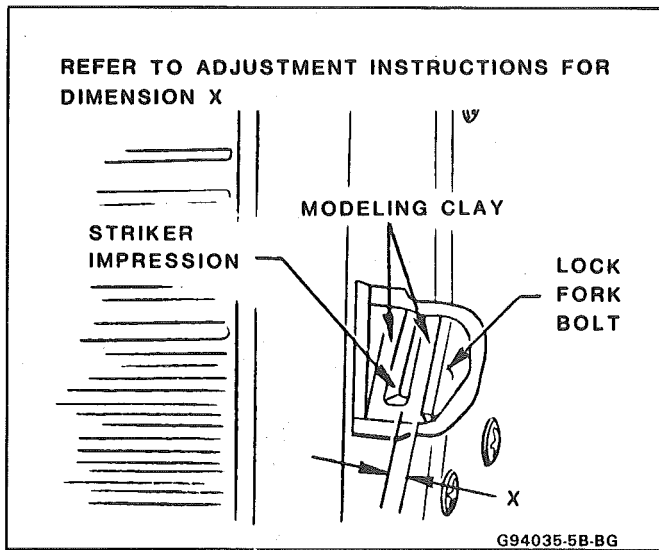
Lock-to-Striker Fore and Aft Adjustment
